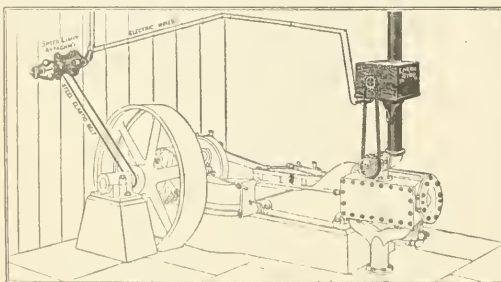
SHOWING ENGINE STOP INSTALLED.
